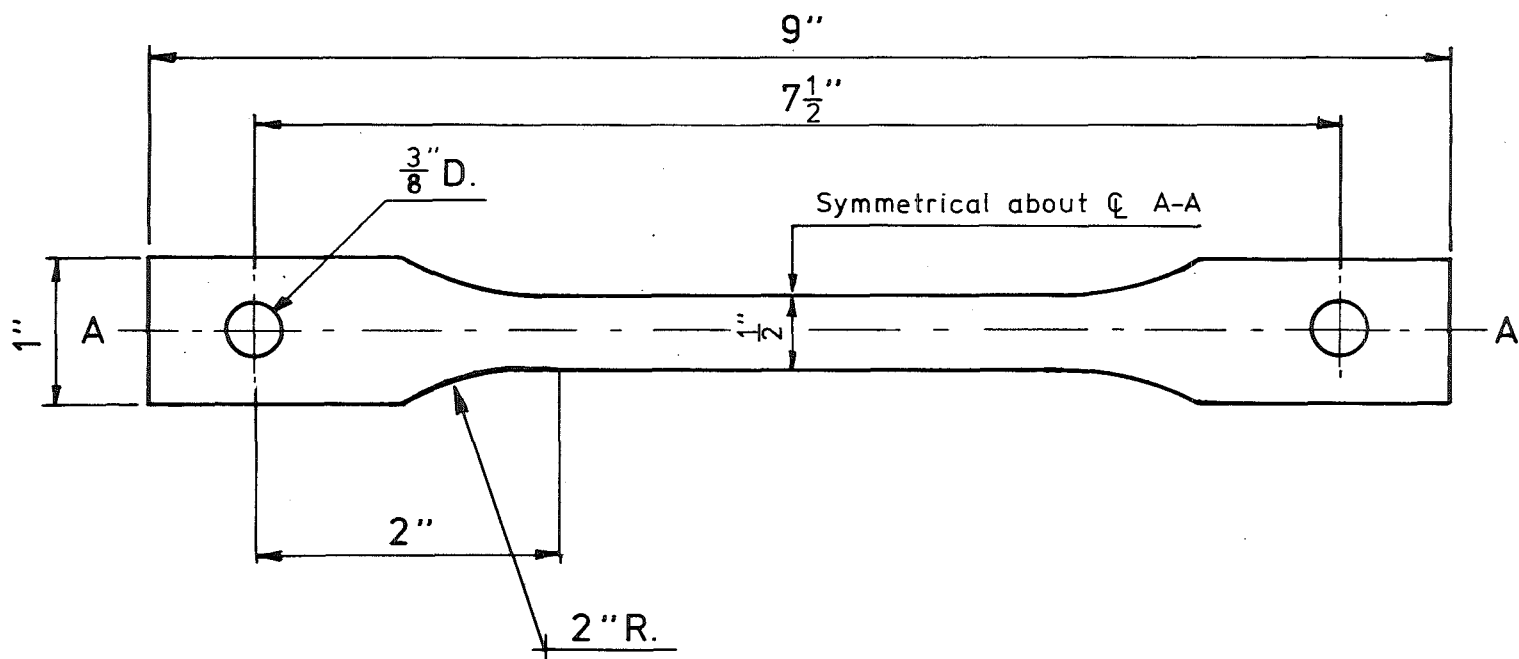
MAKROLON CALIBRATION TEST PIECE
